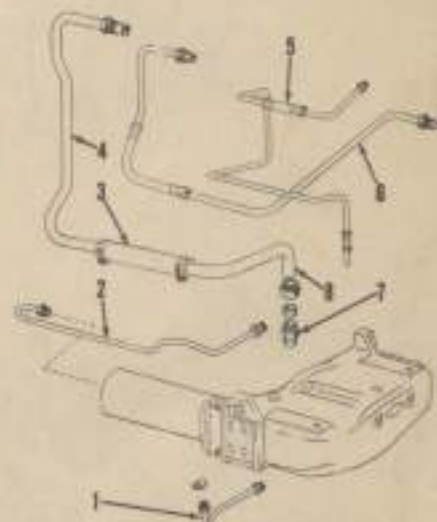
A—Exploded view showing general layout of power steering tubes used on D-17 diesel models of tractor Serial No. D17-38964 and up.
